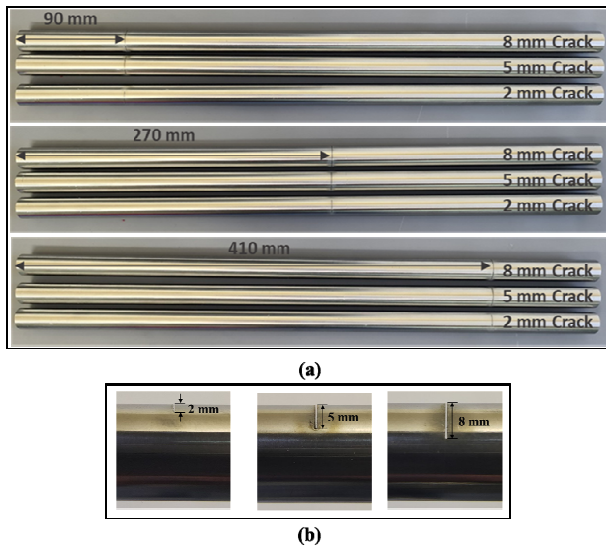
(a) Crack Simulations on Shafts (b) Side View
